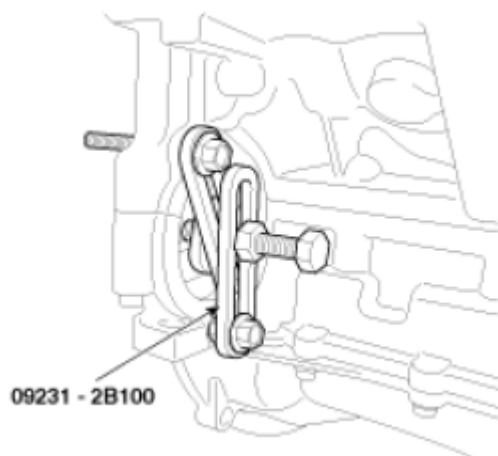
Installing Crankshaft Pulley Bolt Using SST (Ring Gear Stopper, 09231-2B100)
